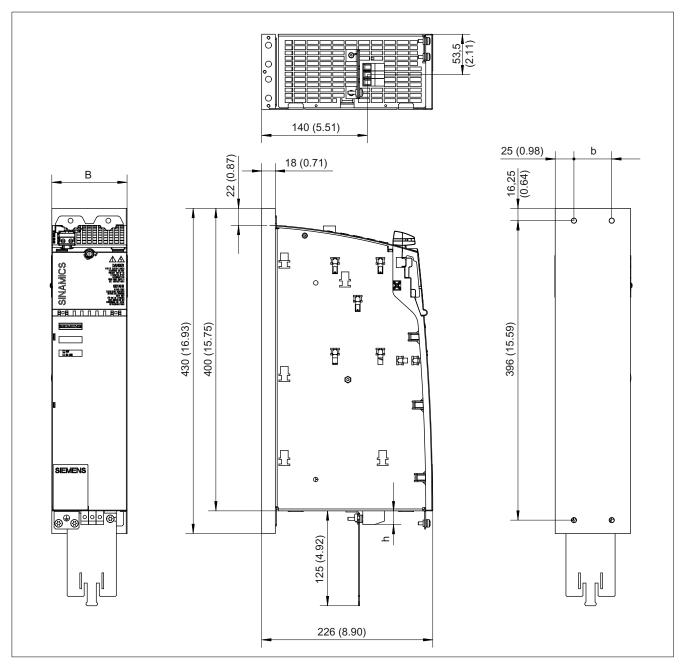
Dimension drawing of 16 kW Active Line Module with cold plate, all dimensions in mm and (inches)
